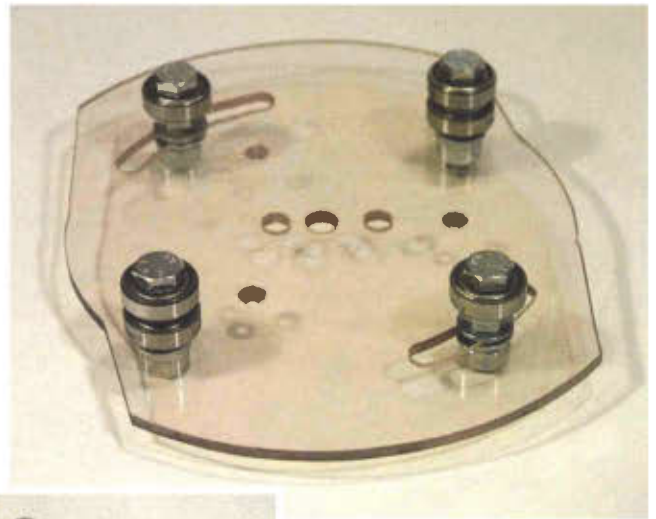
(above) The completed shoe for the vice-mounted jig with two fixed bearings, two adjustable bearings, and other holes for router bit, mounted holes and vacuum holes.
